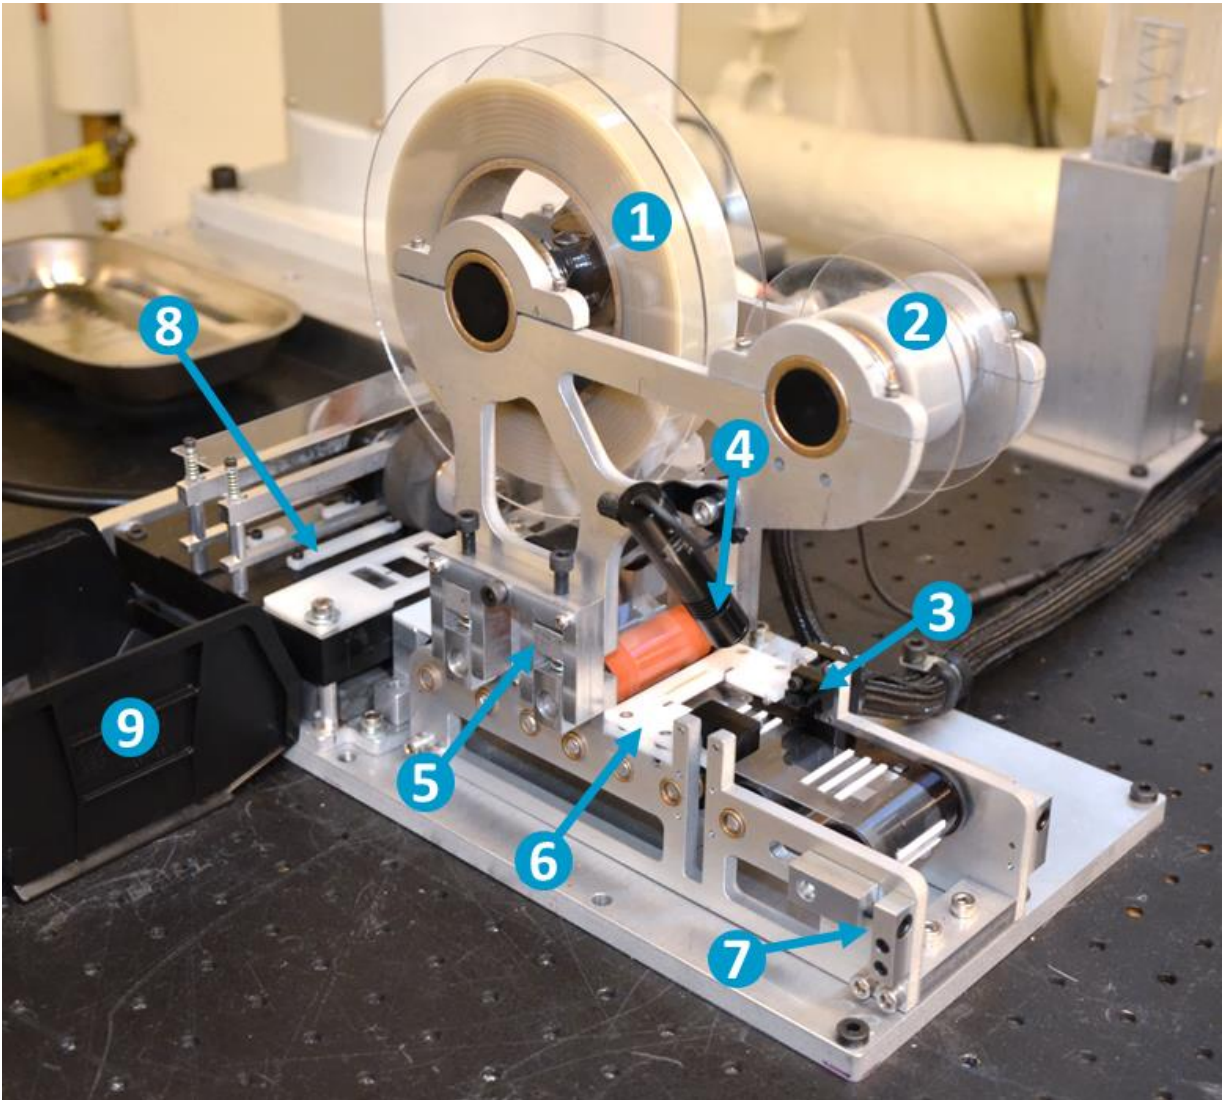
The final taping machine. (1) The tape reel, (2) The liner take-up reel, powered by a miniature geared DC motor, (3) A photo interrupter to index the belt, (4) A light to improve sensor readings, (5) The adjustable-force compliant roller system for applying tape, (6) Plastic guides to align chips before taping, (7) The belt tensioner, (8) The cutting block where chips are separated by air-powered rotary blades, and (9) The waste bin for collecting scraps of tape.
